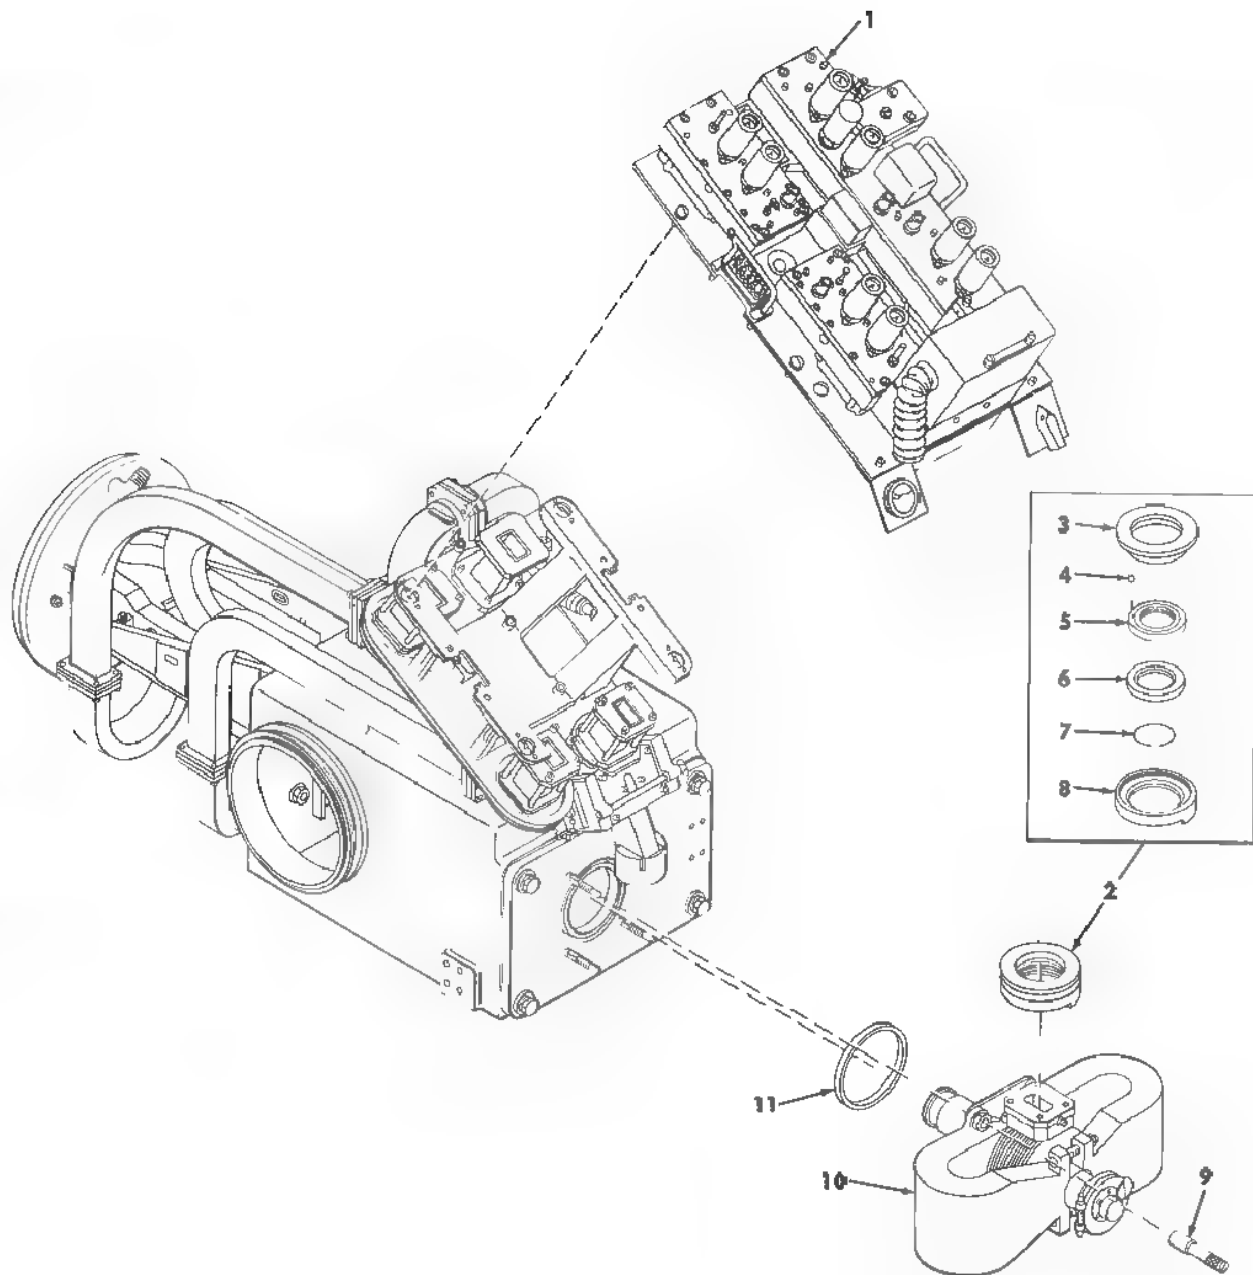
CONVERTER, WAVEFORM /9143120/ PARTIAL EXPLODED VIEW
